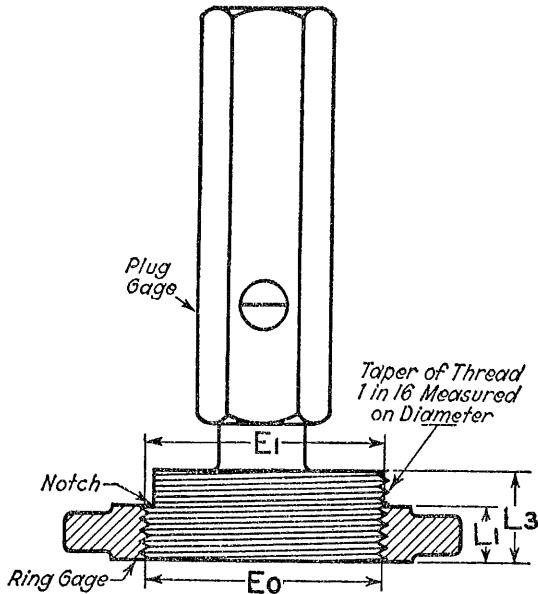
Standard taper pipe thread plug and ring gages.
